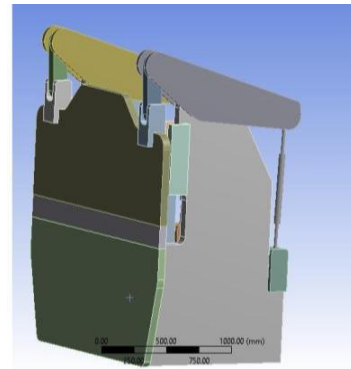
Modeling View of Hydraulic Operated Press Brake.
